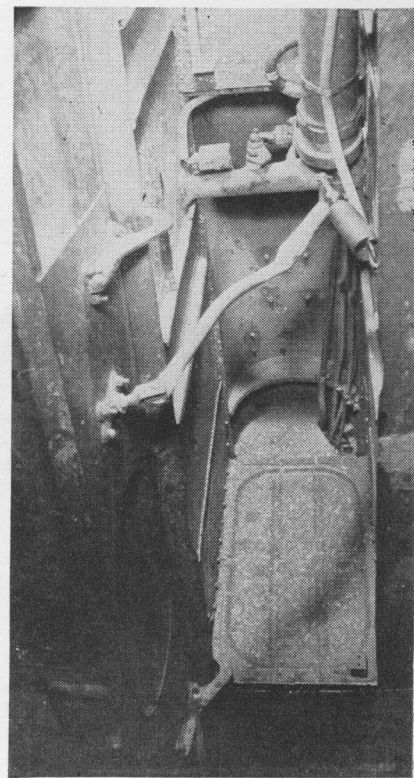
Looking aft and up into the nose wheel well at the retracting cylinder attachment. As the nose wheel retracts, it strikes a tubular linkage to pull and lock the fairing door closed.
